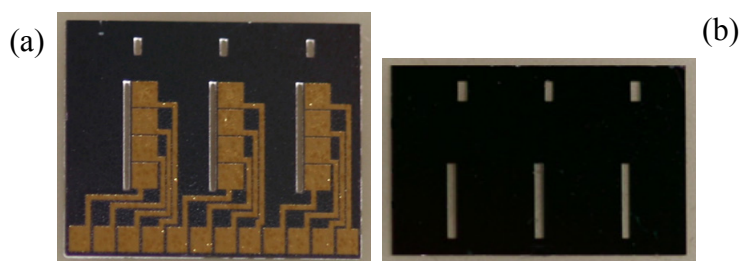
Fabricated array components. a) Top plate. b) Bottom plate.
